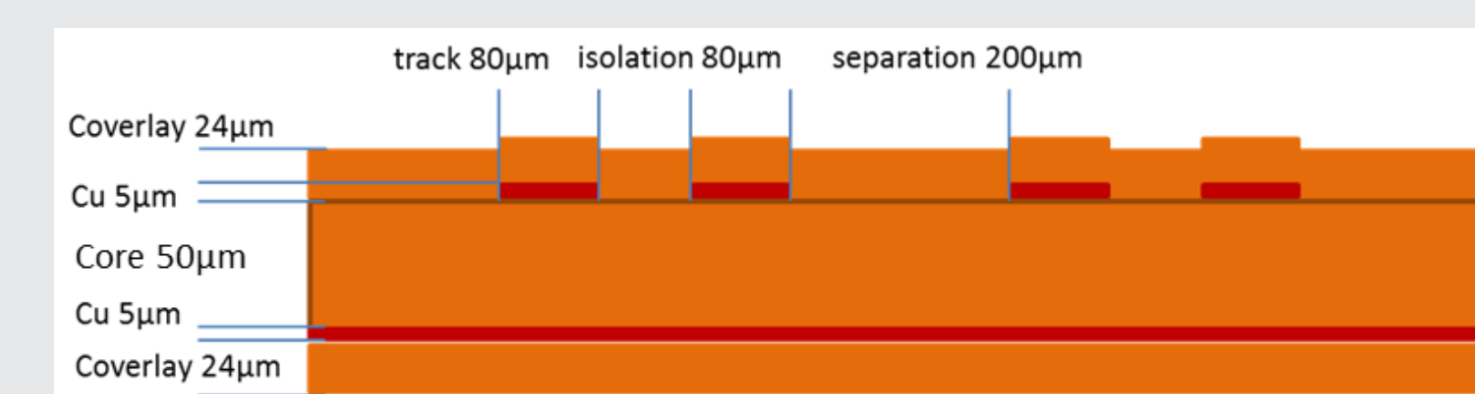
Sectional drawing through a stave flex cable (picture by N. Massol, LAPP)
